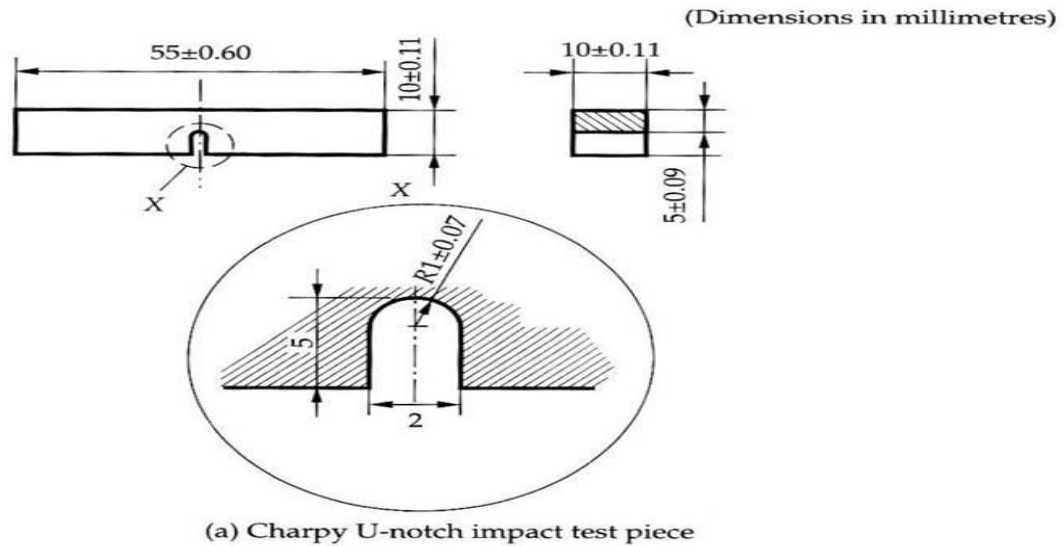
Typical U- notch charpy impact test specimen [38].
